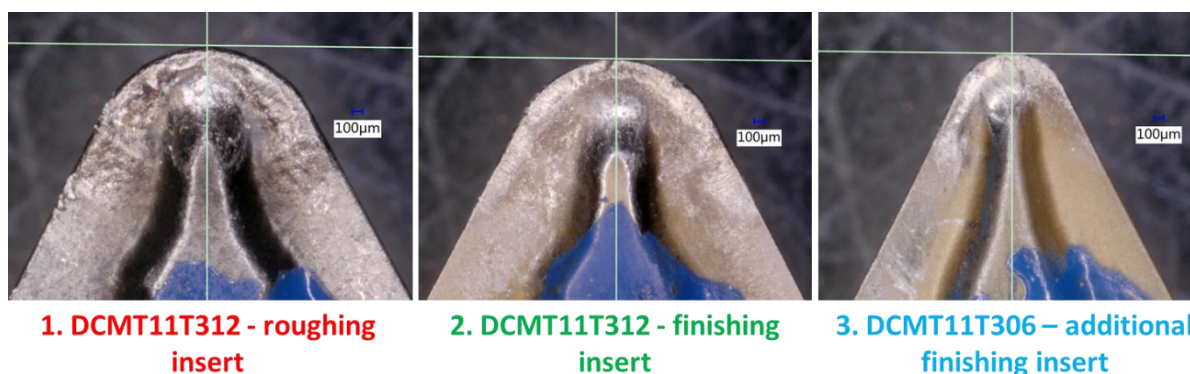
Tool wear on inner contour turning inserts: roughing insert (left), finishing insert (middle) & additional finishing insert (right)
